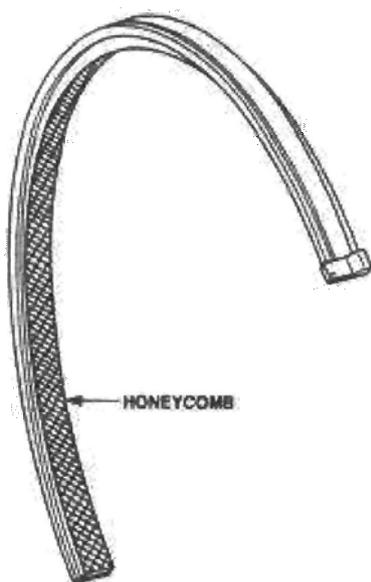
Honeycomb turbine shroud ring segment and assembly
